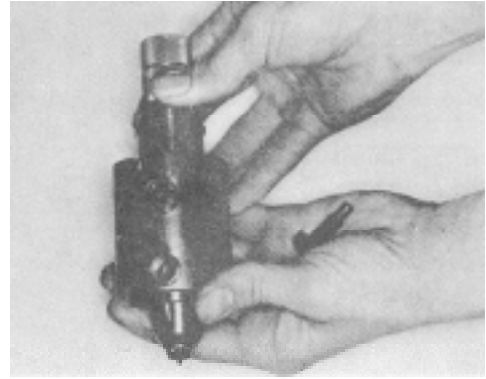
, F60203. Center injector inlet in ST1058 inlet hole
